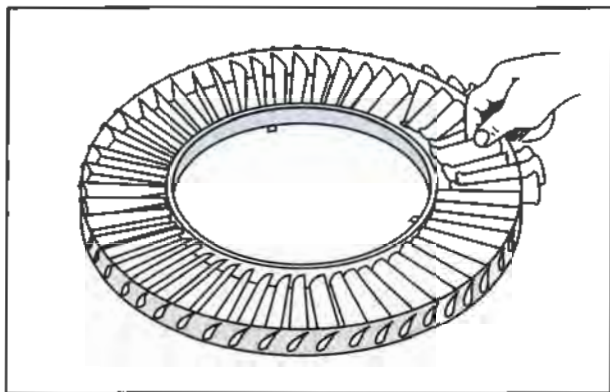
A loose fit between the vanes and shrouds permits thermal expansion without warping the turbine nozzle assembly.
